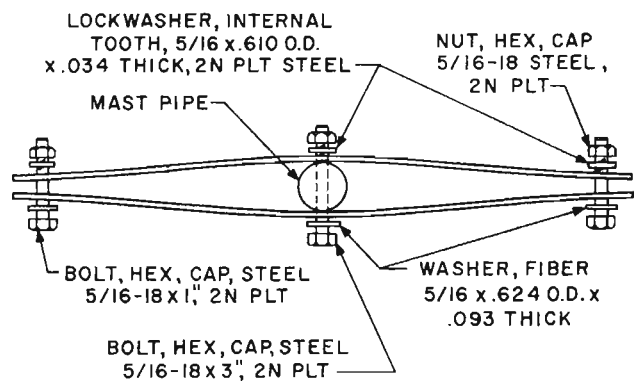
Method of Attaching KS-16705-Type Signs to List 70 Mast
